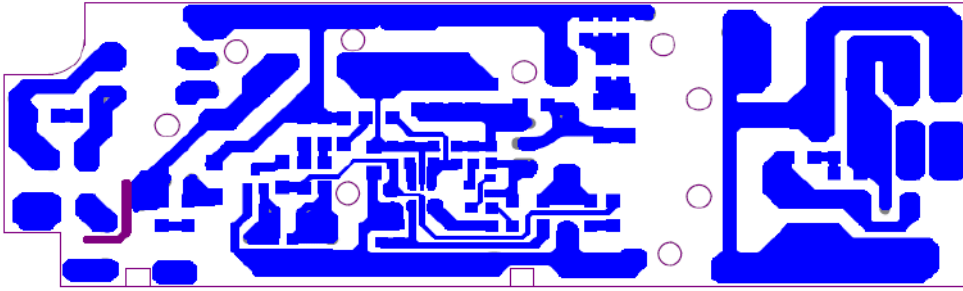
PCB Trace layout of LED Driver models DRM-060T360120, DRM-060T360160, DRM-060T360120-1, DRM-060T360160-1
